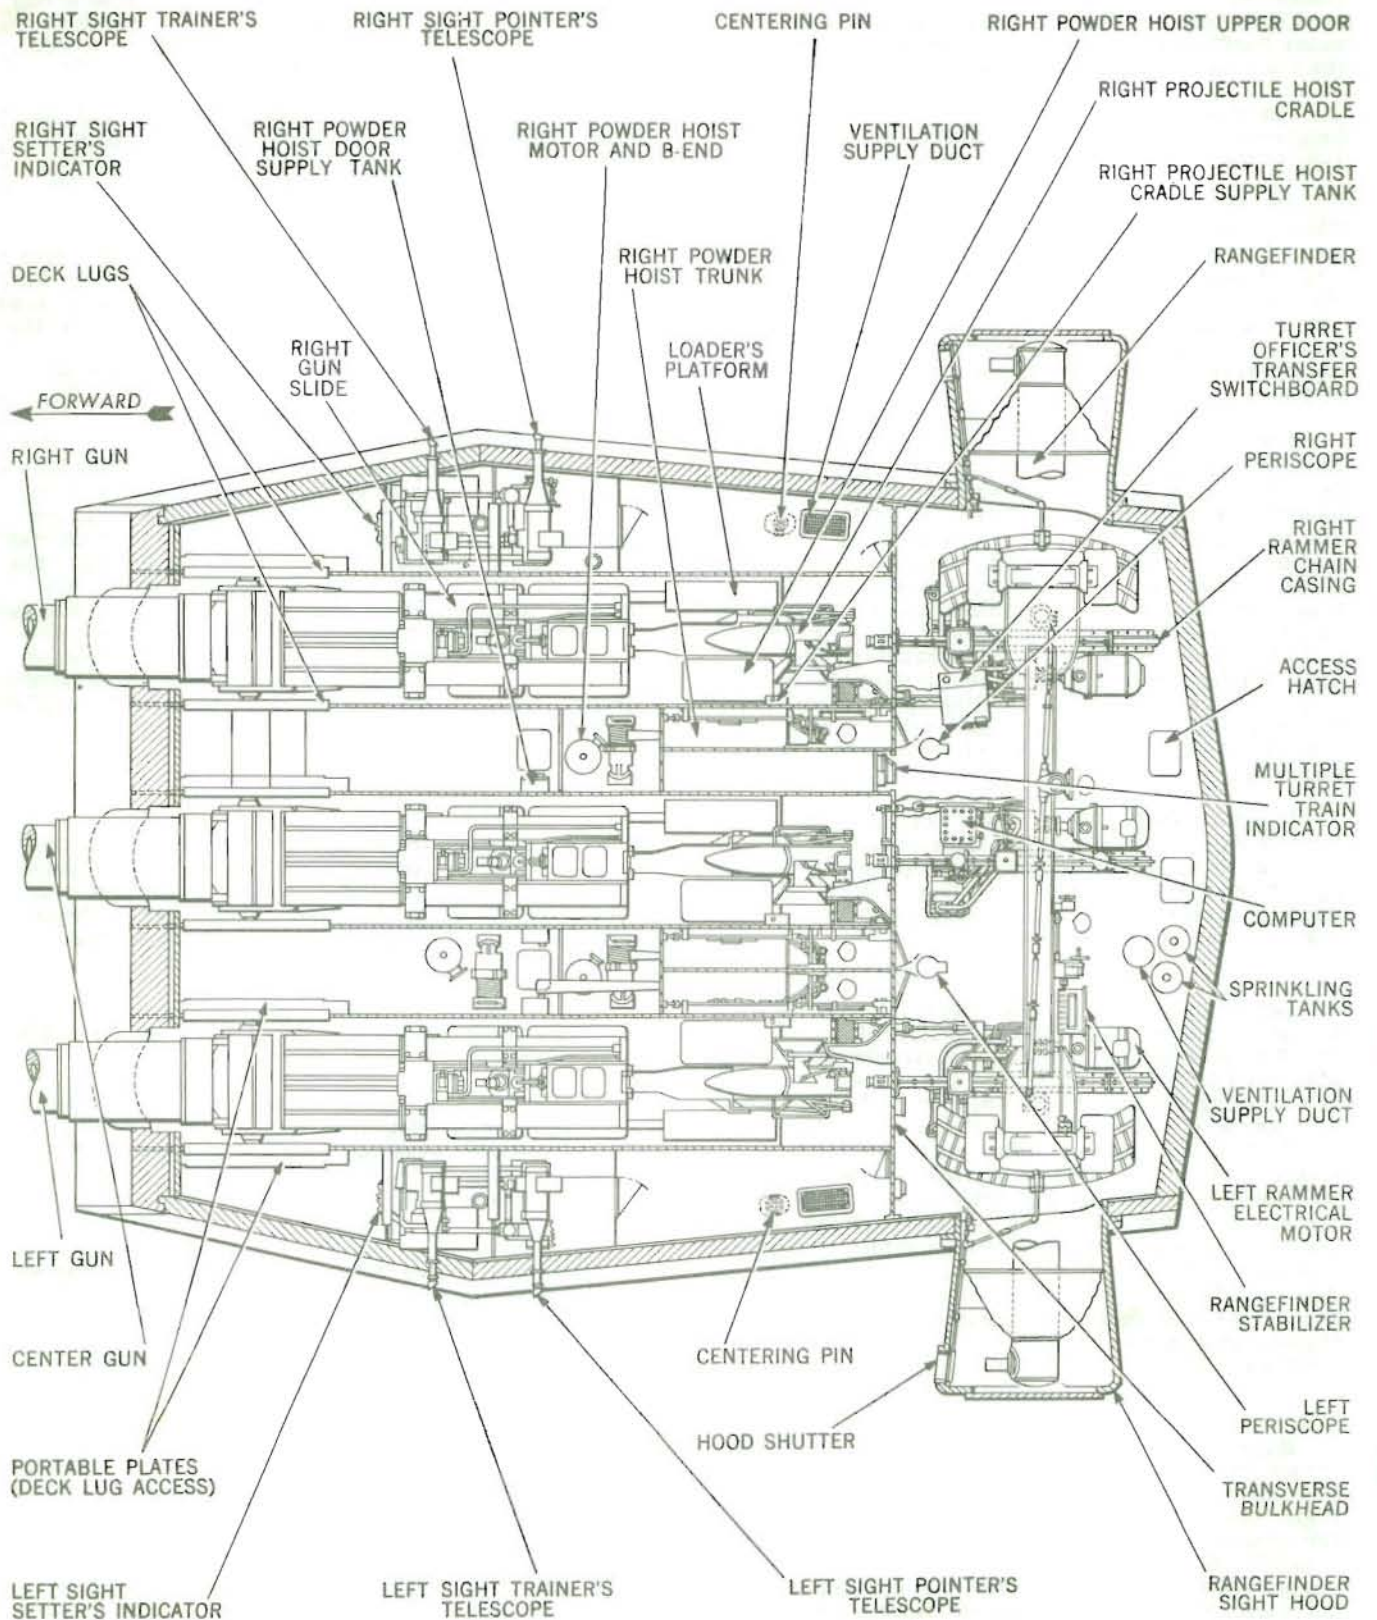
Ordnance Equipment in Gun House - General Arrangement - Plan View
